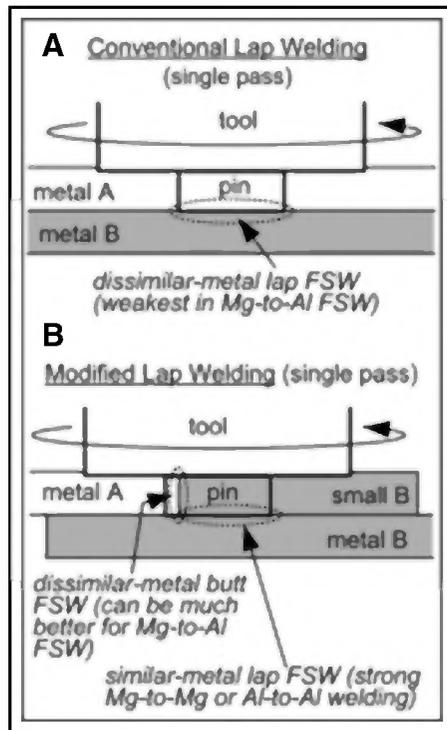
Single-pass FSW of metal A to metal B in a lap joint. A — Conventional lap joint; B — modified lap joint (by butt joint welding a small piece of metal B to metal A with pin penetration into bottom metal B).
